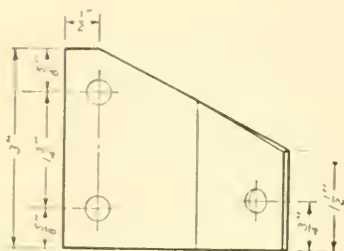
Connecting bracket for special chain board, Case-Osborne corn binder
